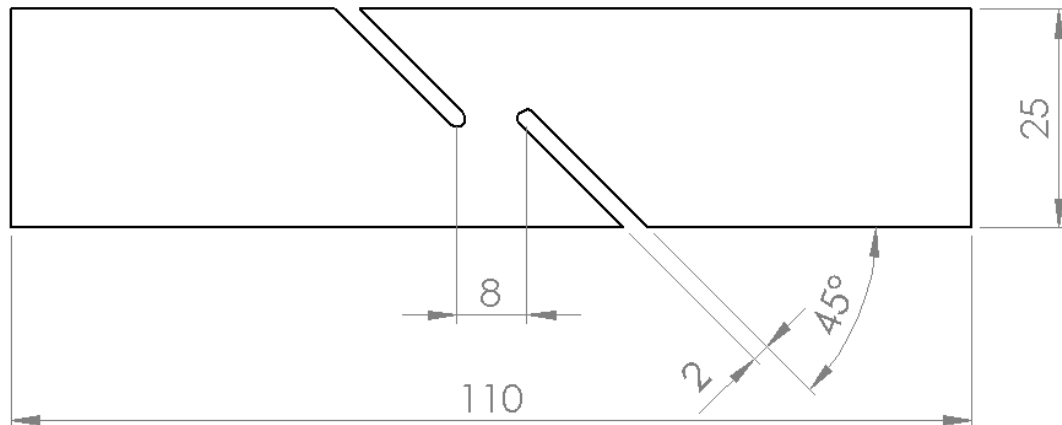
Technical drawing of a Scherzug specimen for quasi-static shear fracture
